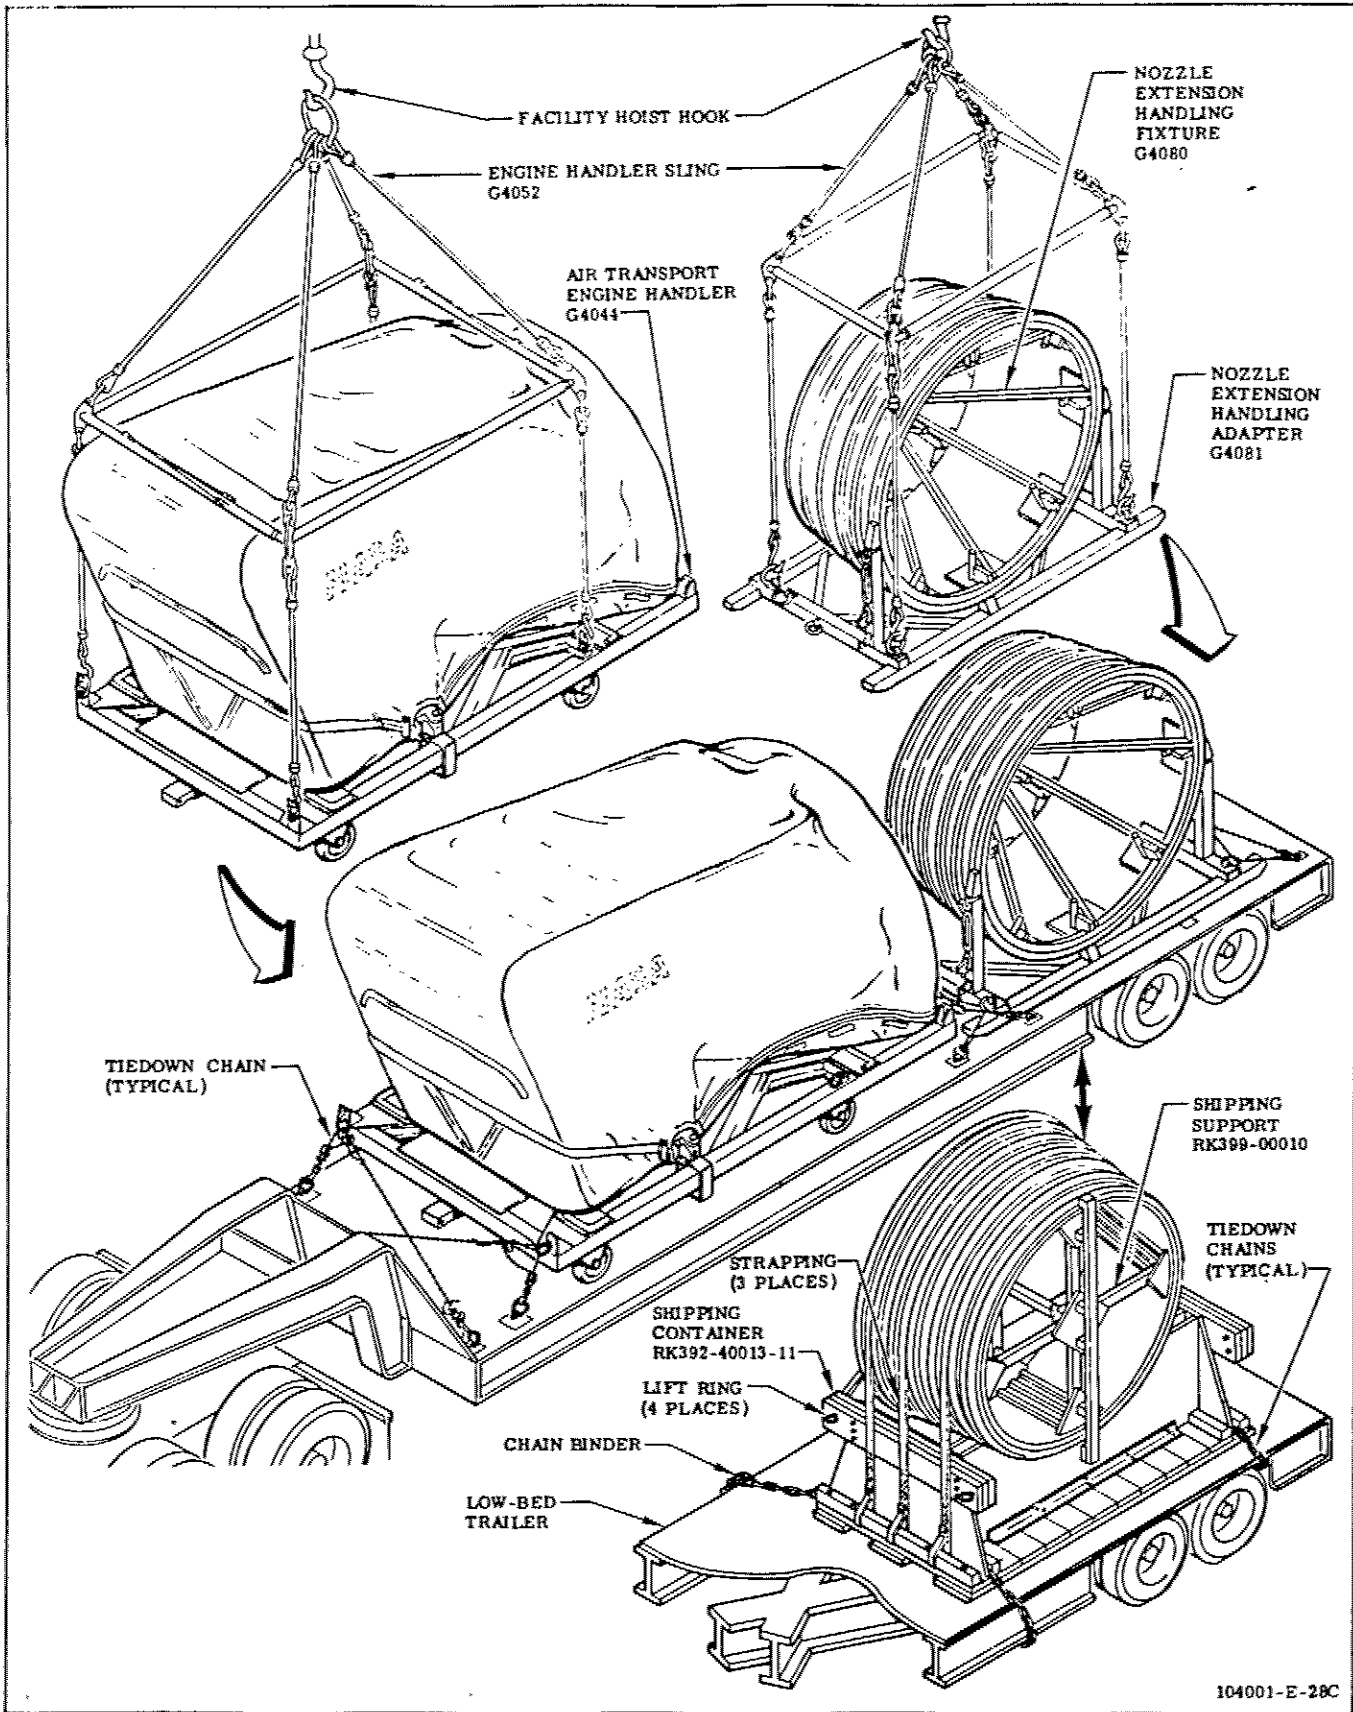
Loading Engine and Nozzle Extension on Low-Bed Trailer (Sheet 1 of 3)
